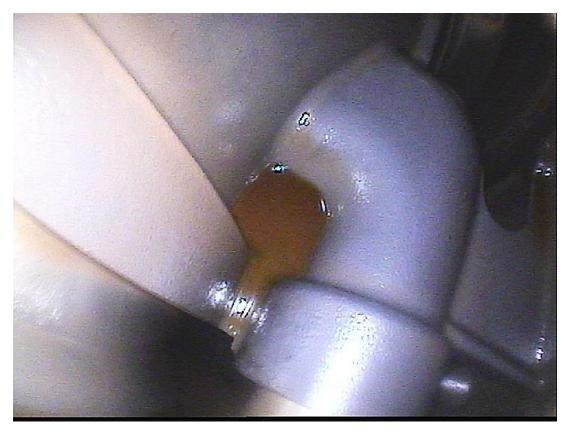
Photo of a pool of oil inside engine No. 1 discovered during borescope inspection
